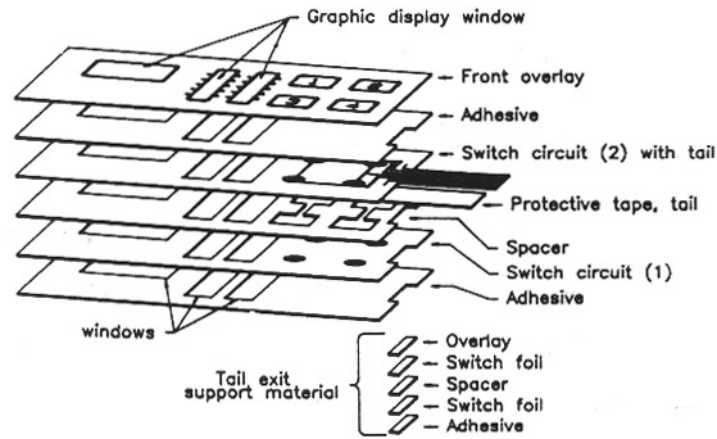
b): Exploded view of simple switch panel [5.20].
